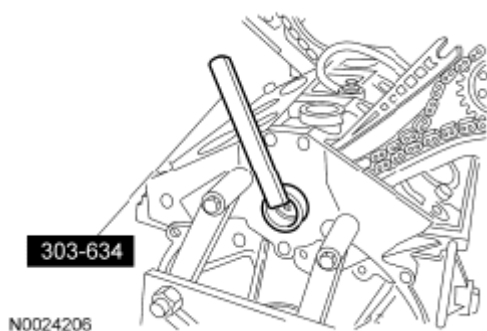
Identifying Rear Jack Shaft Socket On Rear Of Jackshaft
